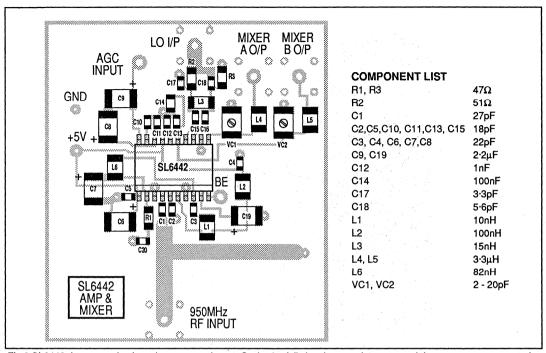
SL6442 demonstration board component layout. Scale=2 x full size. Input and output coaxial connectors are mounted on the ground plane side of the board.
